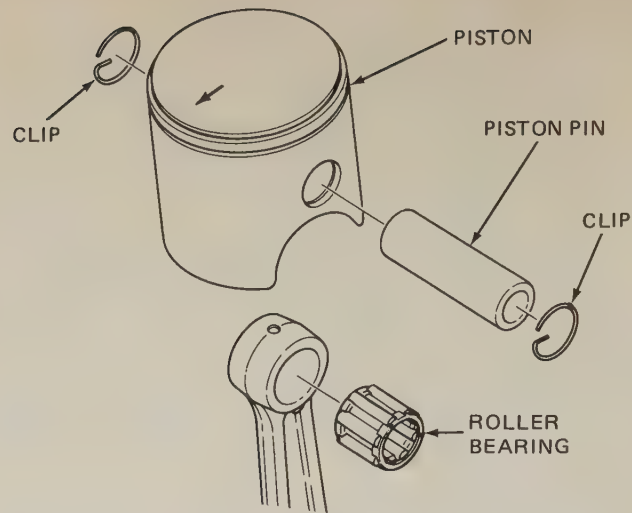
Piston and connecting-rod assembly that uses a roller bearing in the small end of the connecting rod. (Yamaha Motor Company, Ltd.)
